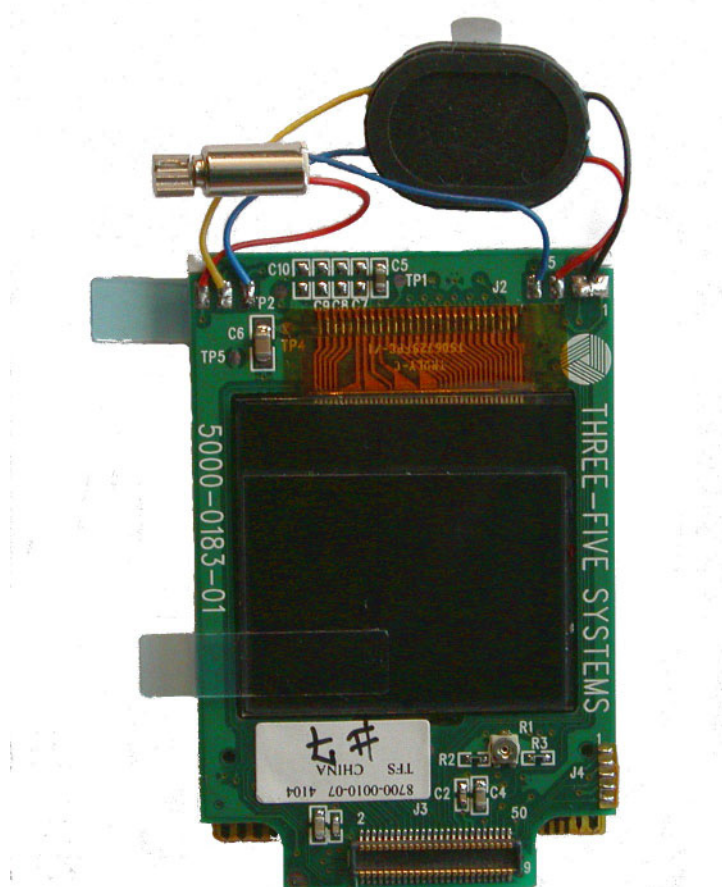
Display module with Keyrin earpiece/loud speaker transducers soldered on the pass trough pad.
